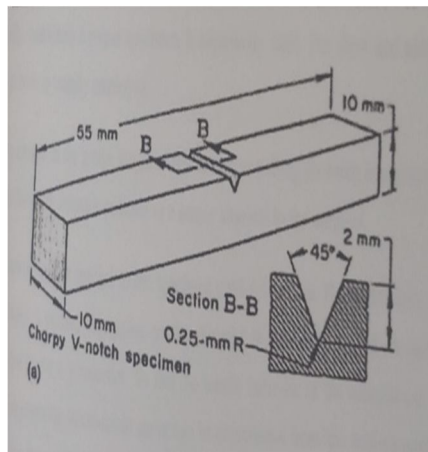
ASTM E 23 V-notch Charpy impact test specimen specification
